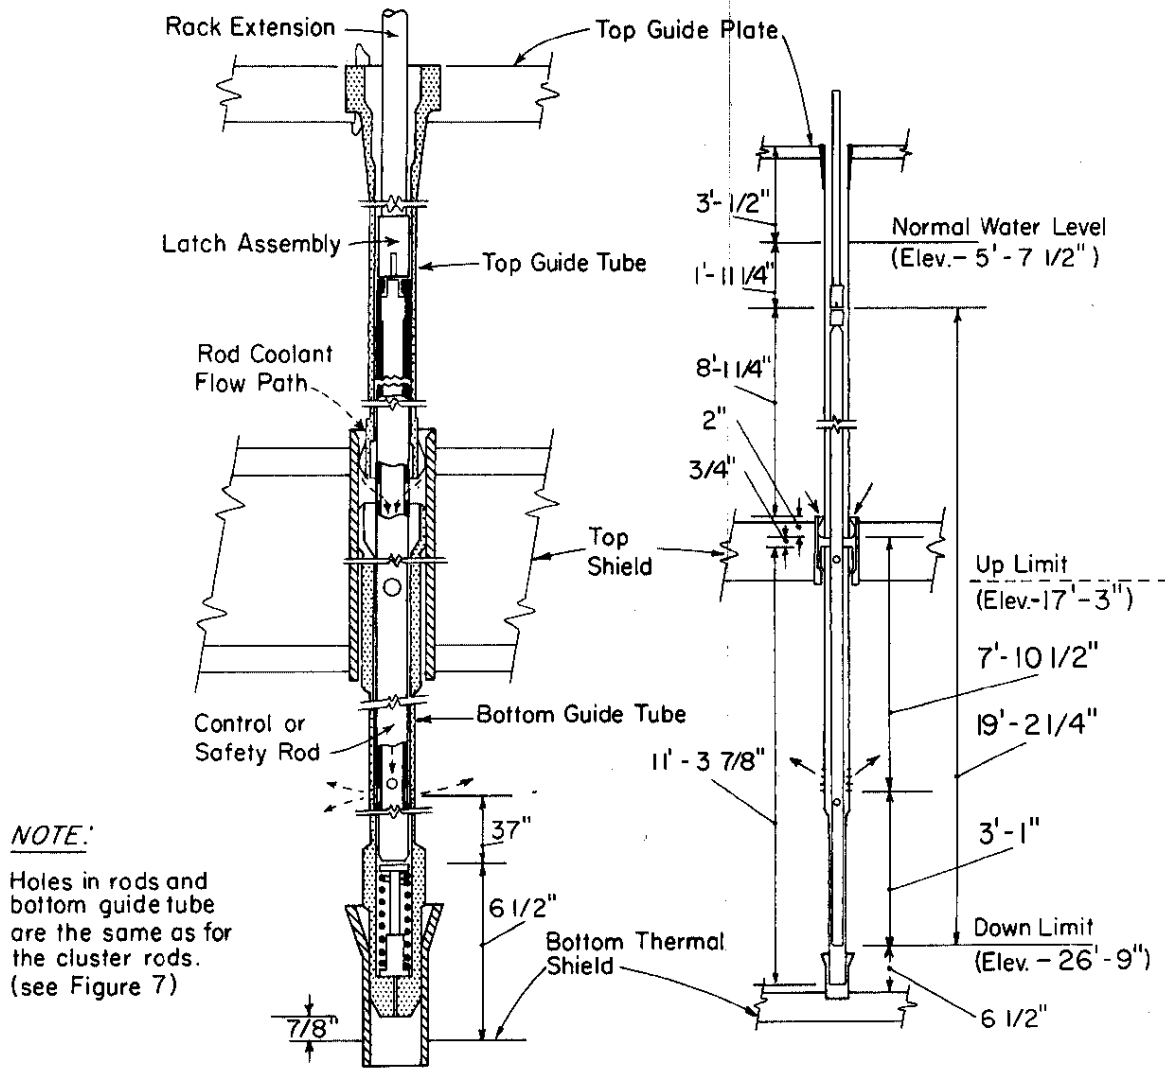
CONTROL AND SAFETY ROD GUIDE TUBE ARRANGEMENT
